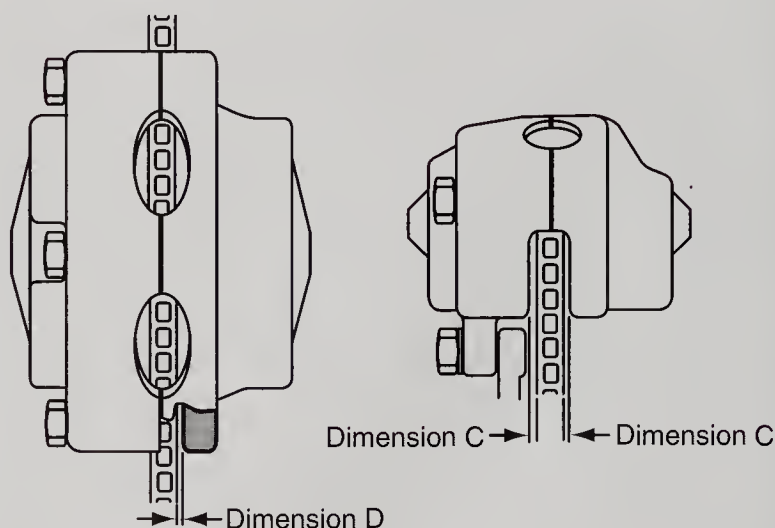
A fixed caliper must be parallel to the rotor surface (Dimension D) and spaced equally on each side of the rotor (Dimension C).
